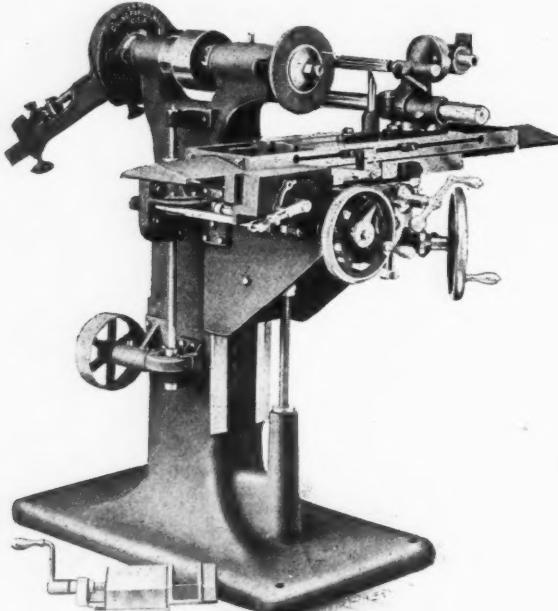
Centers for Reamer Grinding in Use on Table of Surface Grinder.
